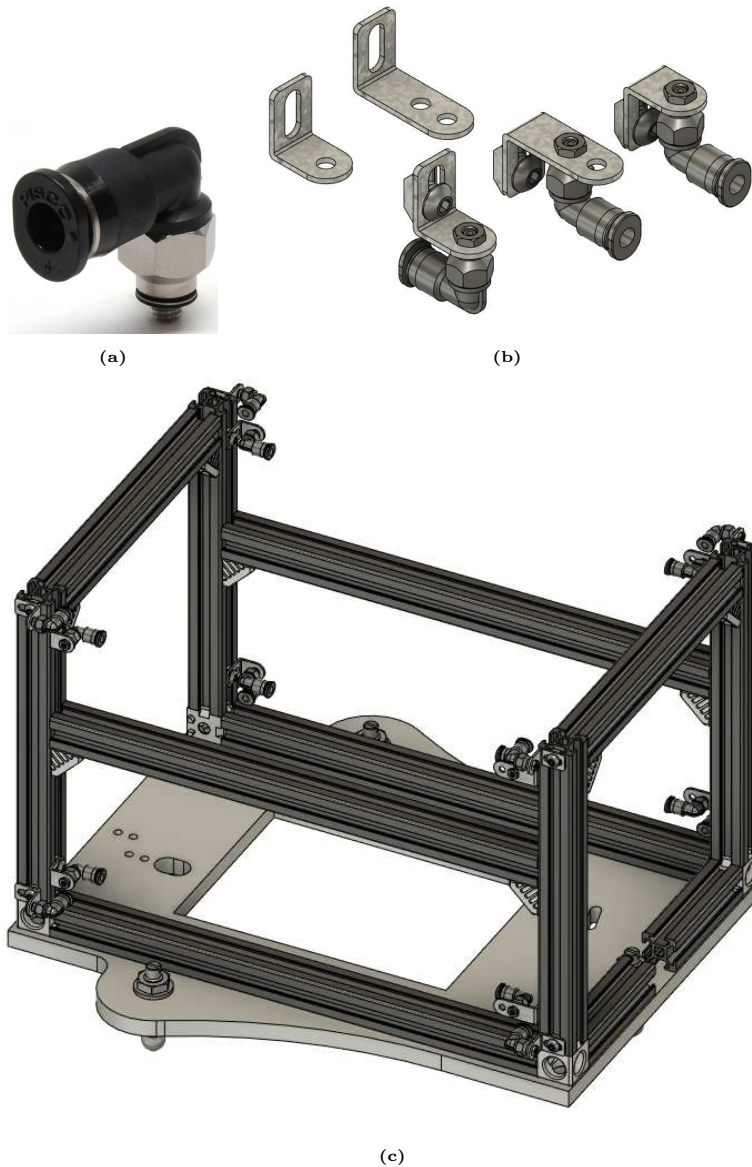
(a) $\phi 1.3$ mm nozzle, (b) CAD model of the nozzle assemblies with a detail on the steel supports and (c) mounting on the structure.
